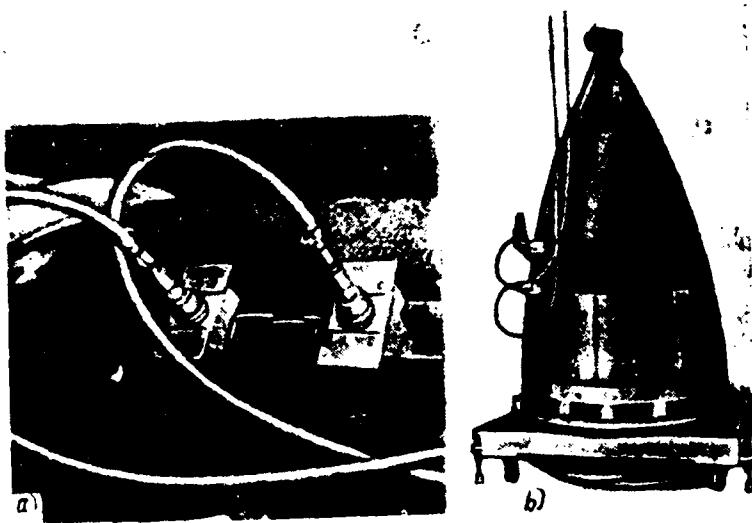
Treatment of light filler of radome: a) pneumatic milling heads; b) general view of milling fixture.
